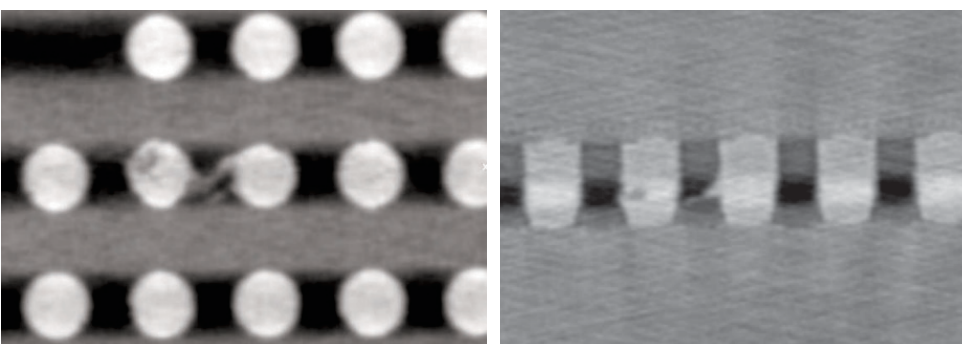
3D X-ray microscopy slice image of (a) solder extrusion from top view and (b) side view.
